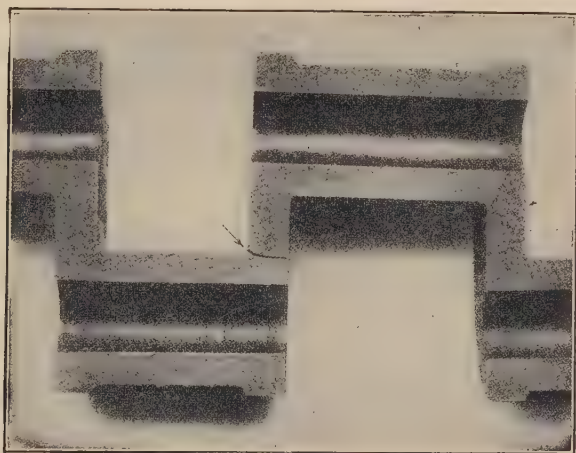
Crankshaft throw cut out of the solid pre-forged blank.
